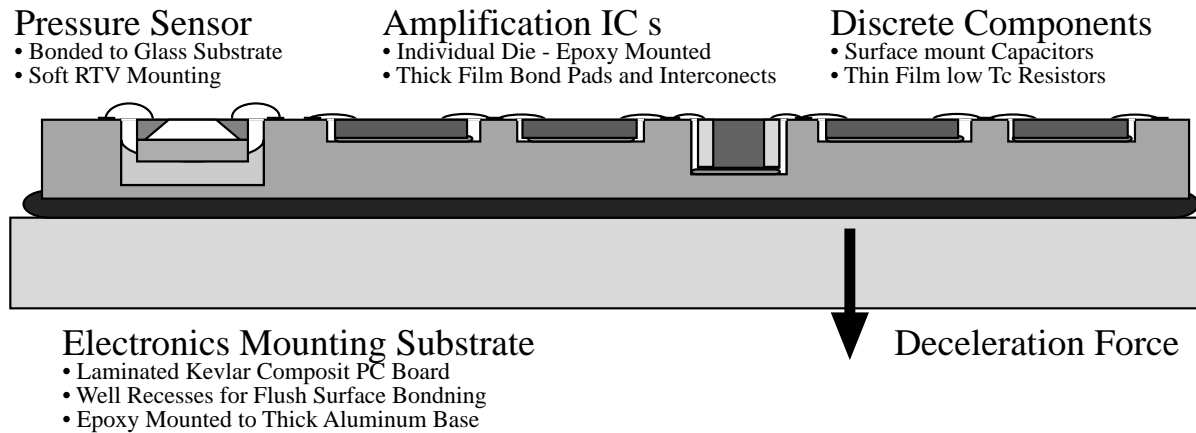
Illustration of the sensor and electronics instrumentation packaging scheme. The sensor will be mounted in a silicone-filled recess in a composite PC board, with discrete circuit components.
